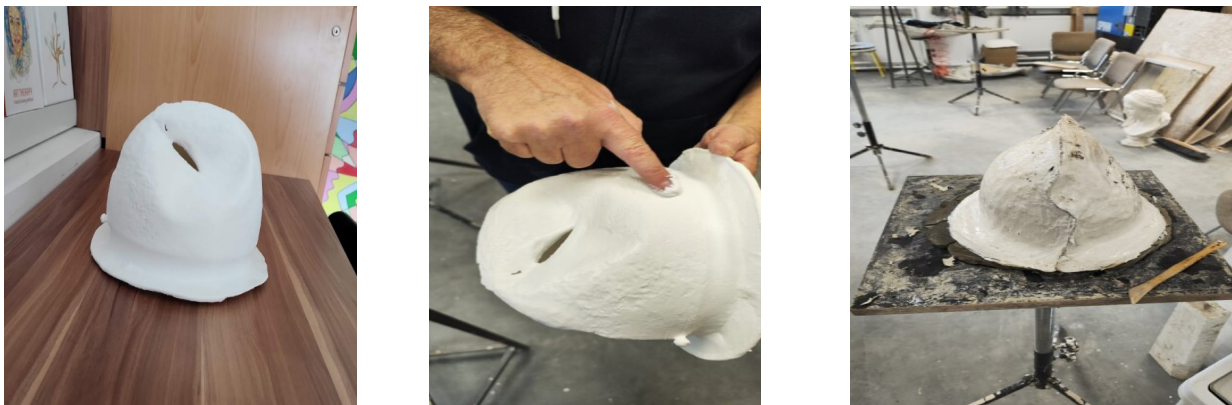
Printed helmet (left), smoothing of the 3D printed model (middle) and silicone rubber applied to the prototype – printed helmet (right).
